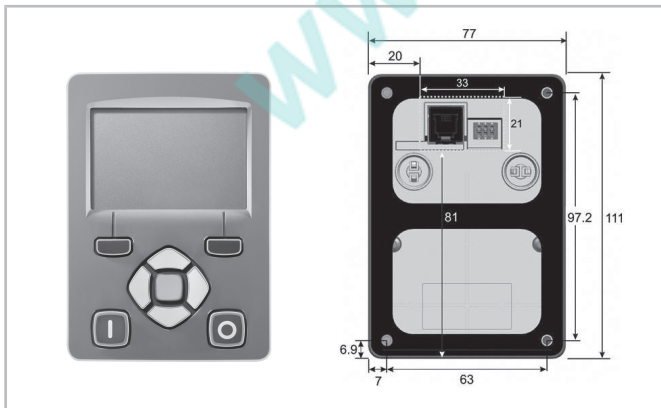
Front and rear view of the control panel with fixing holes and recess on the back (for external mounting to the switch cabinet)
